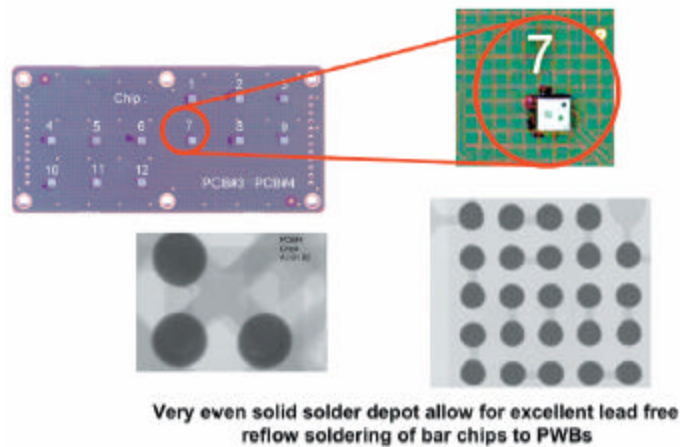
Flip Chip Application soldered to the PCB using Lead Free Solder in Form of a Solid solder Depot (SSD Technology)
